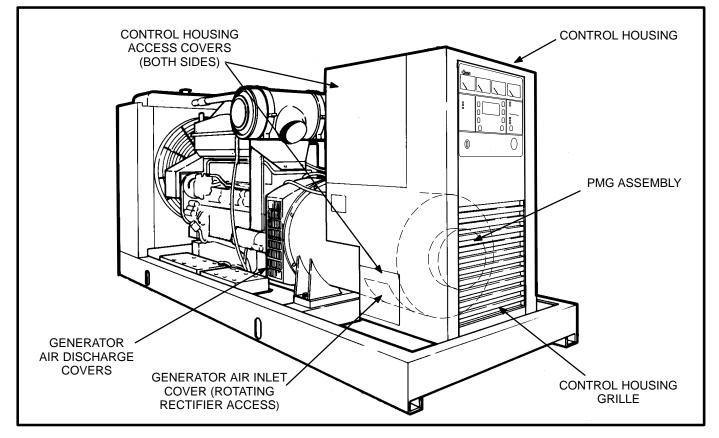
GENERATOR AND CONTROL HOUSING ASSEMBLY
